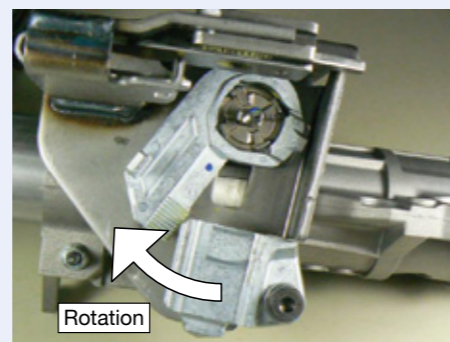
Gear lever and V-gear for the Wedge Gear of the new positive-lock mechanism
